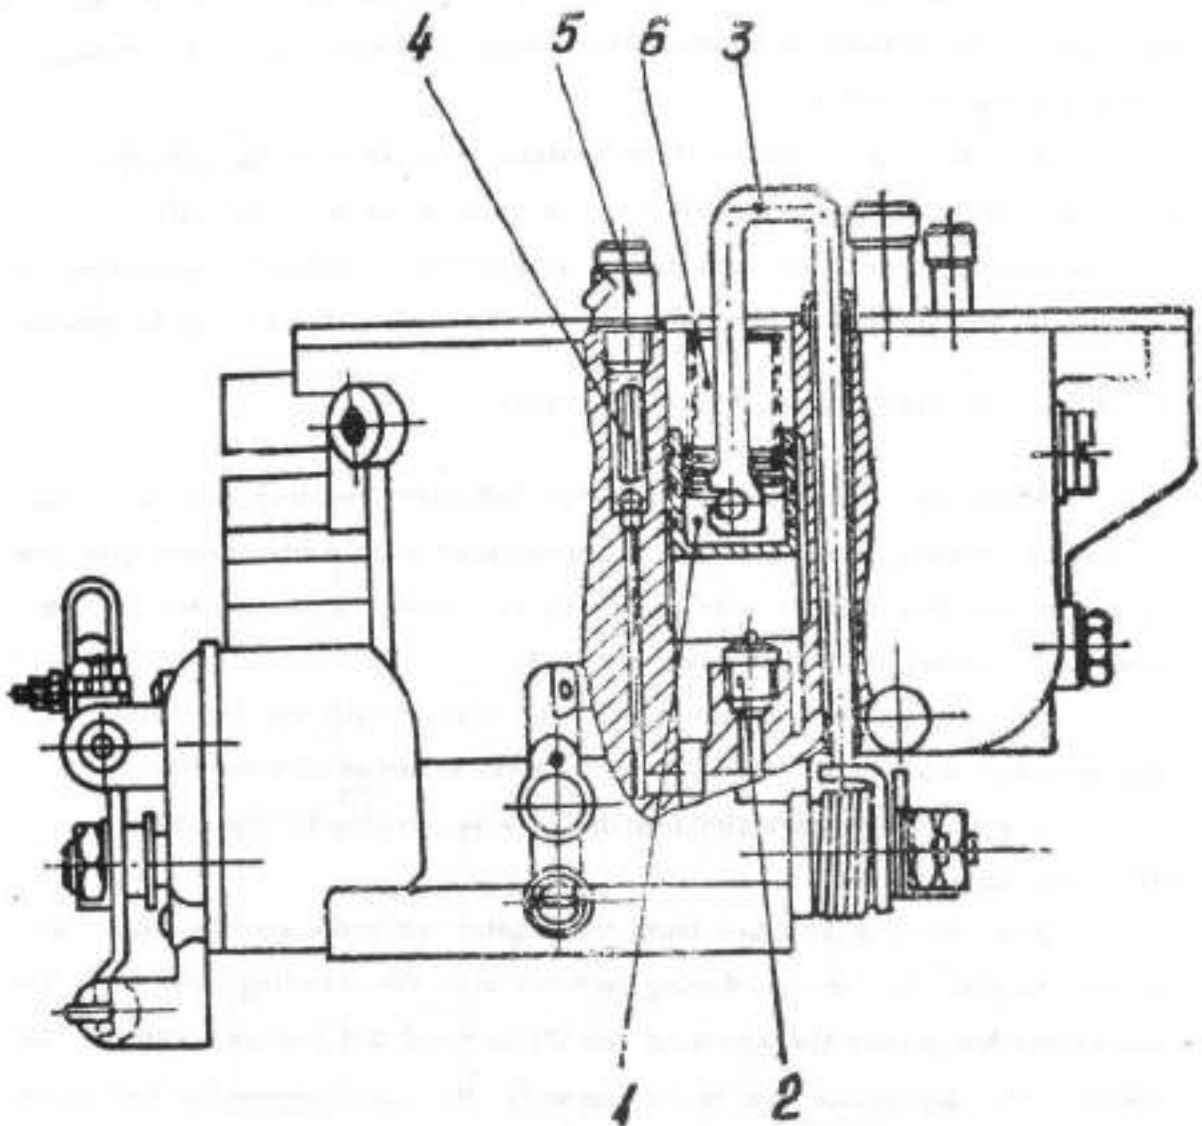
CARBURETTOR ACCELERATION MECHANISM
